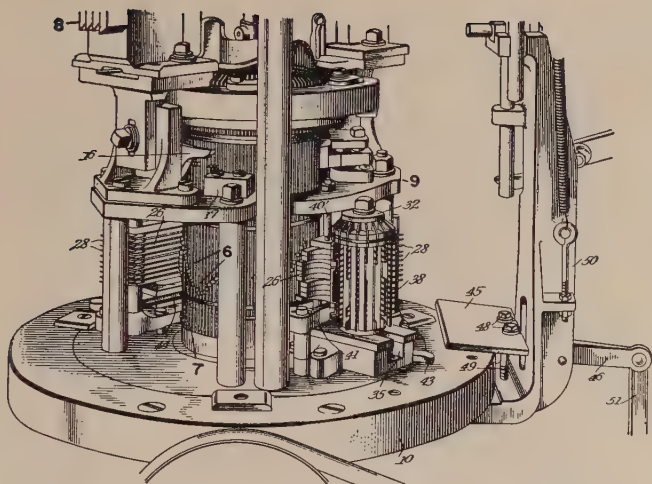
Diagram of the trick wheel knitting machine (Brinton).
